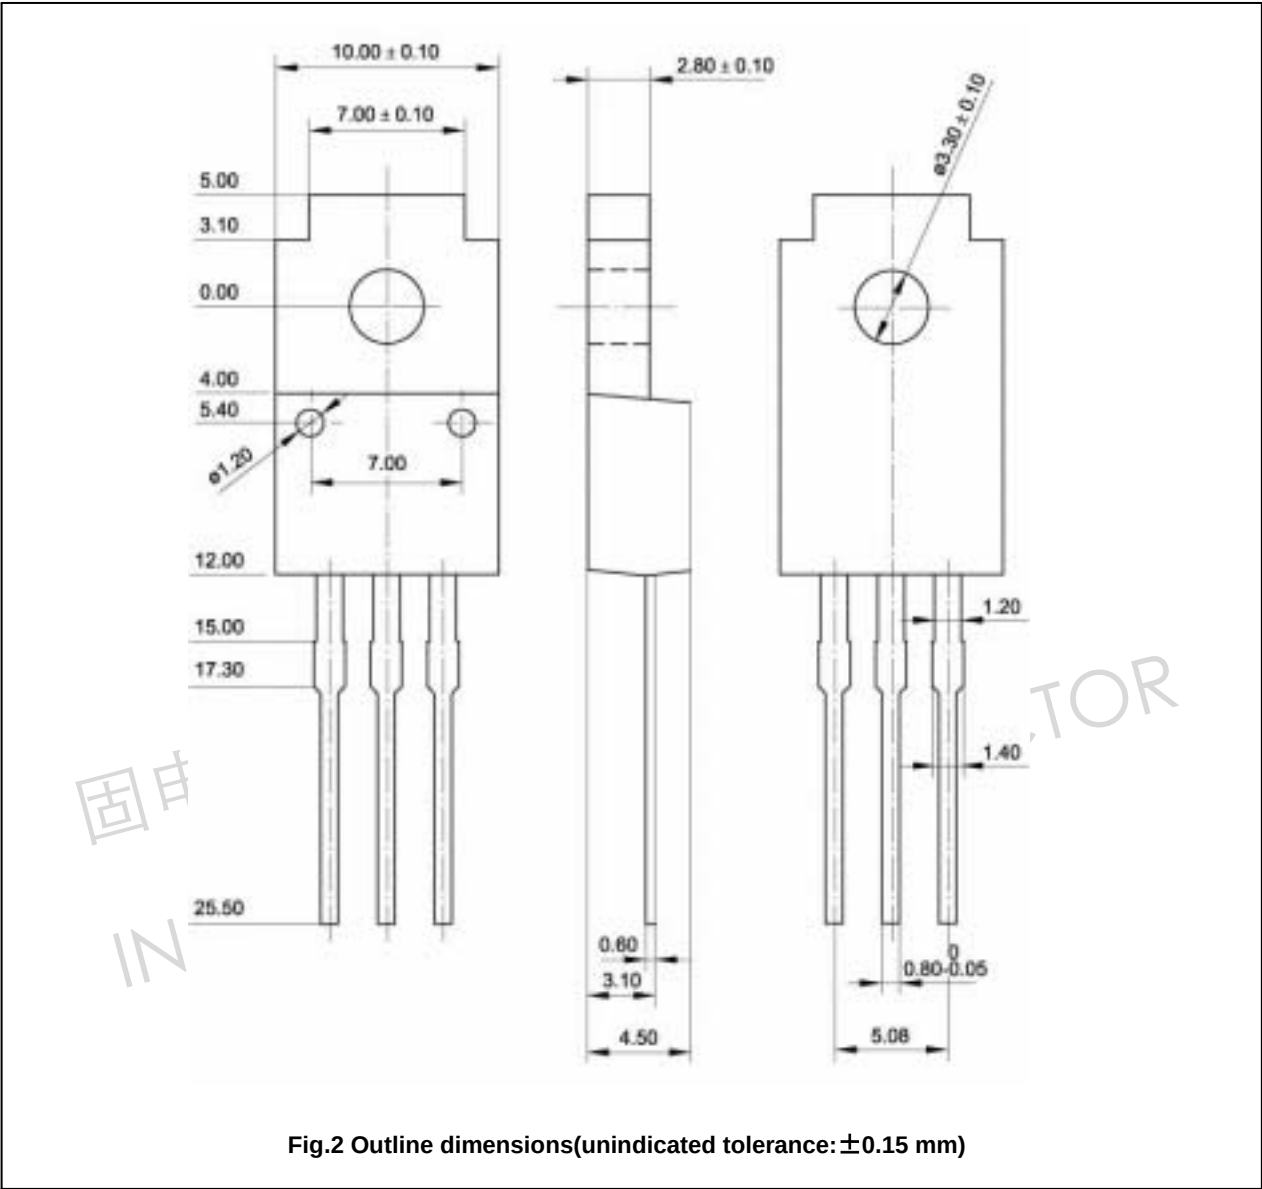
Outline dimensions(unindicated tolerance:  $\pm 0.15$  mm)
